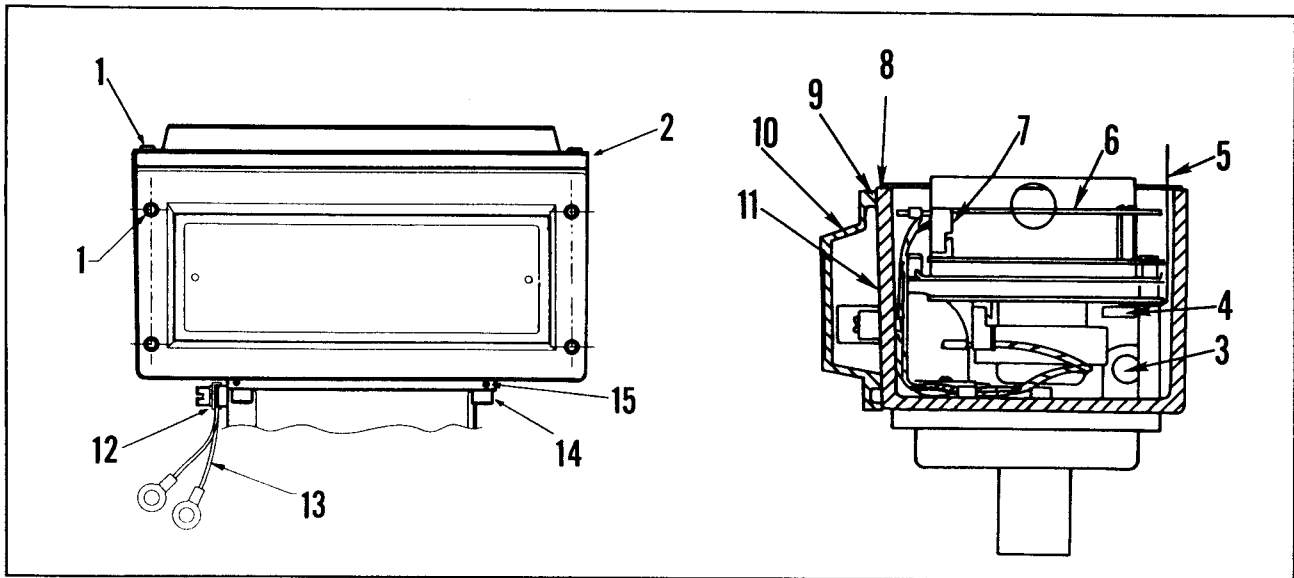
Integral Electronics Box Assembly — All Sizes
